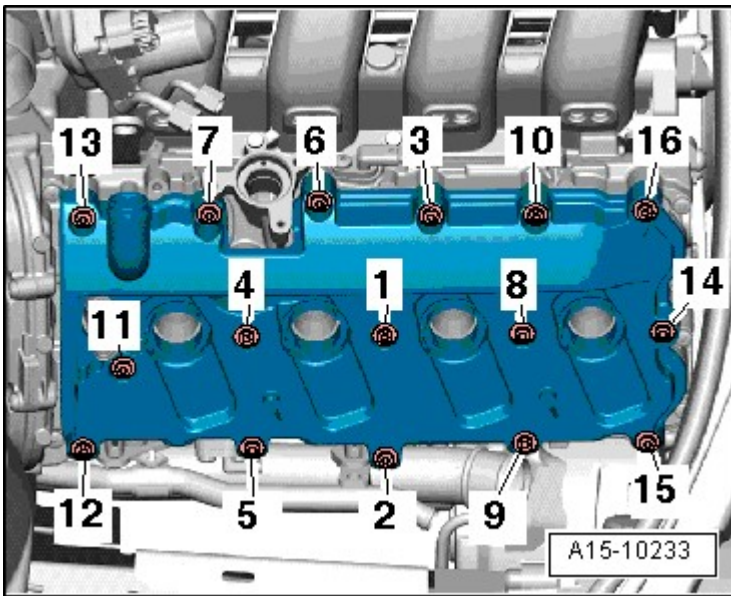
Identifying Right Cylinder Head Cover Bolts Removal Sequence
